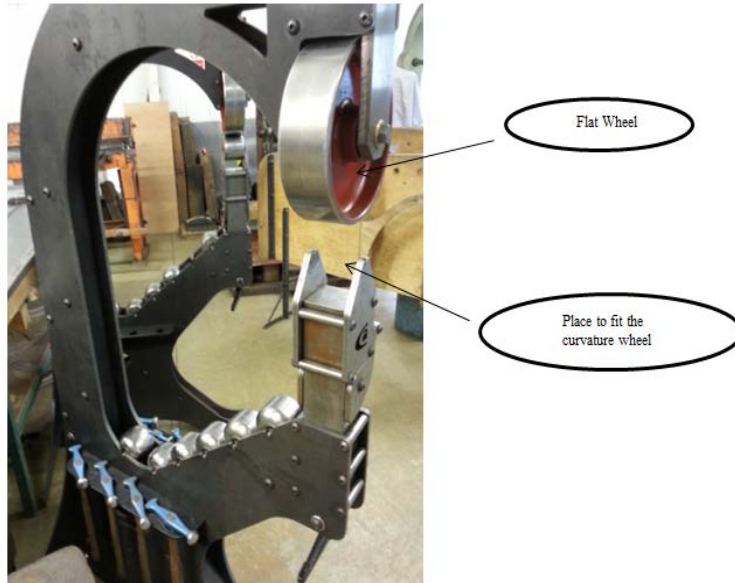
English Wheel without Curved Wheel Mounted
